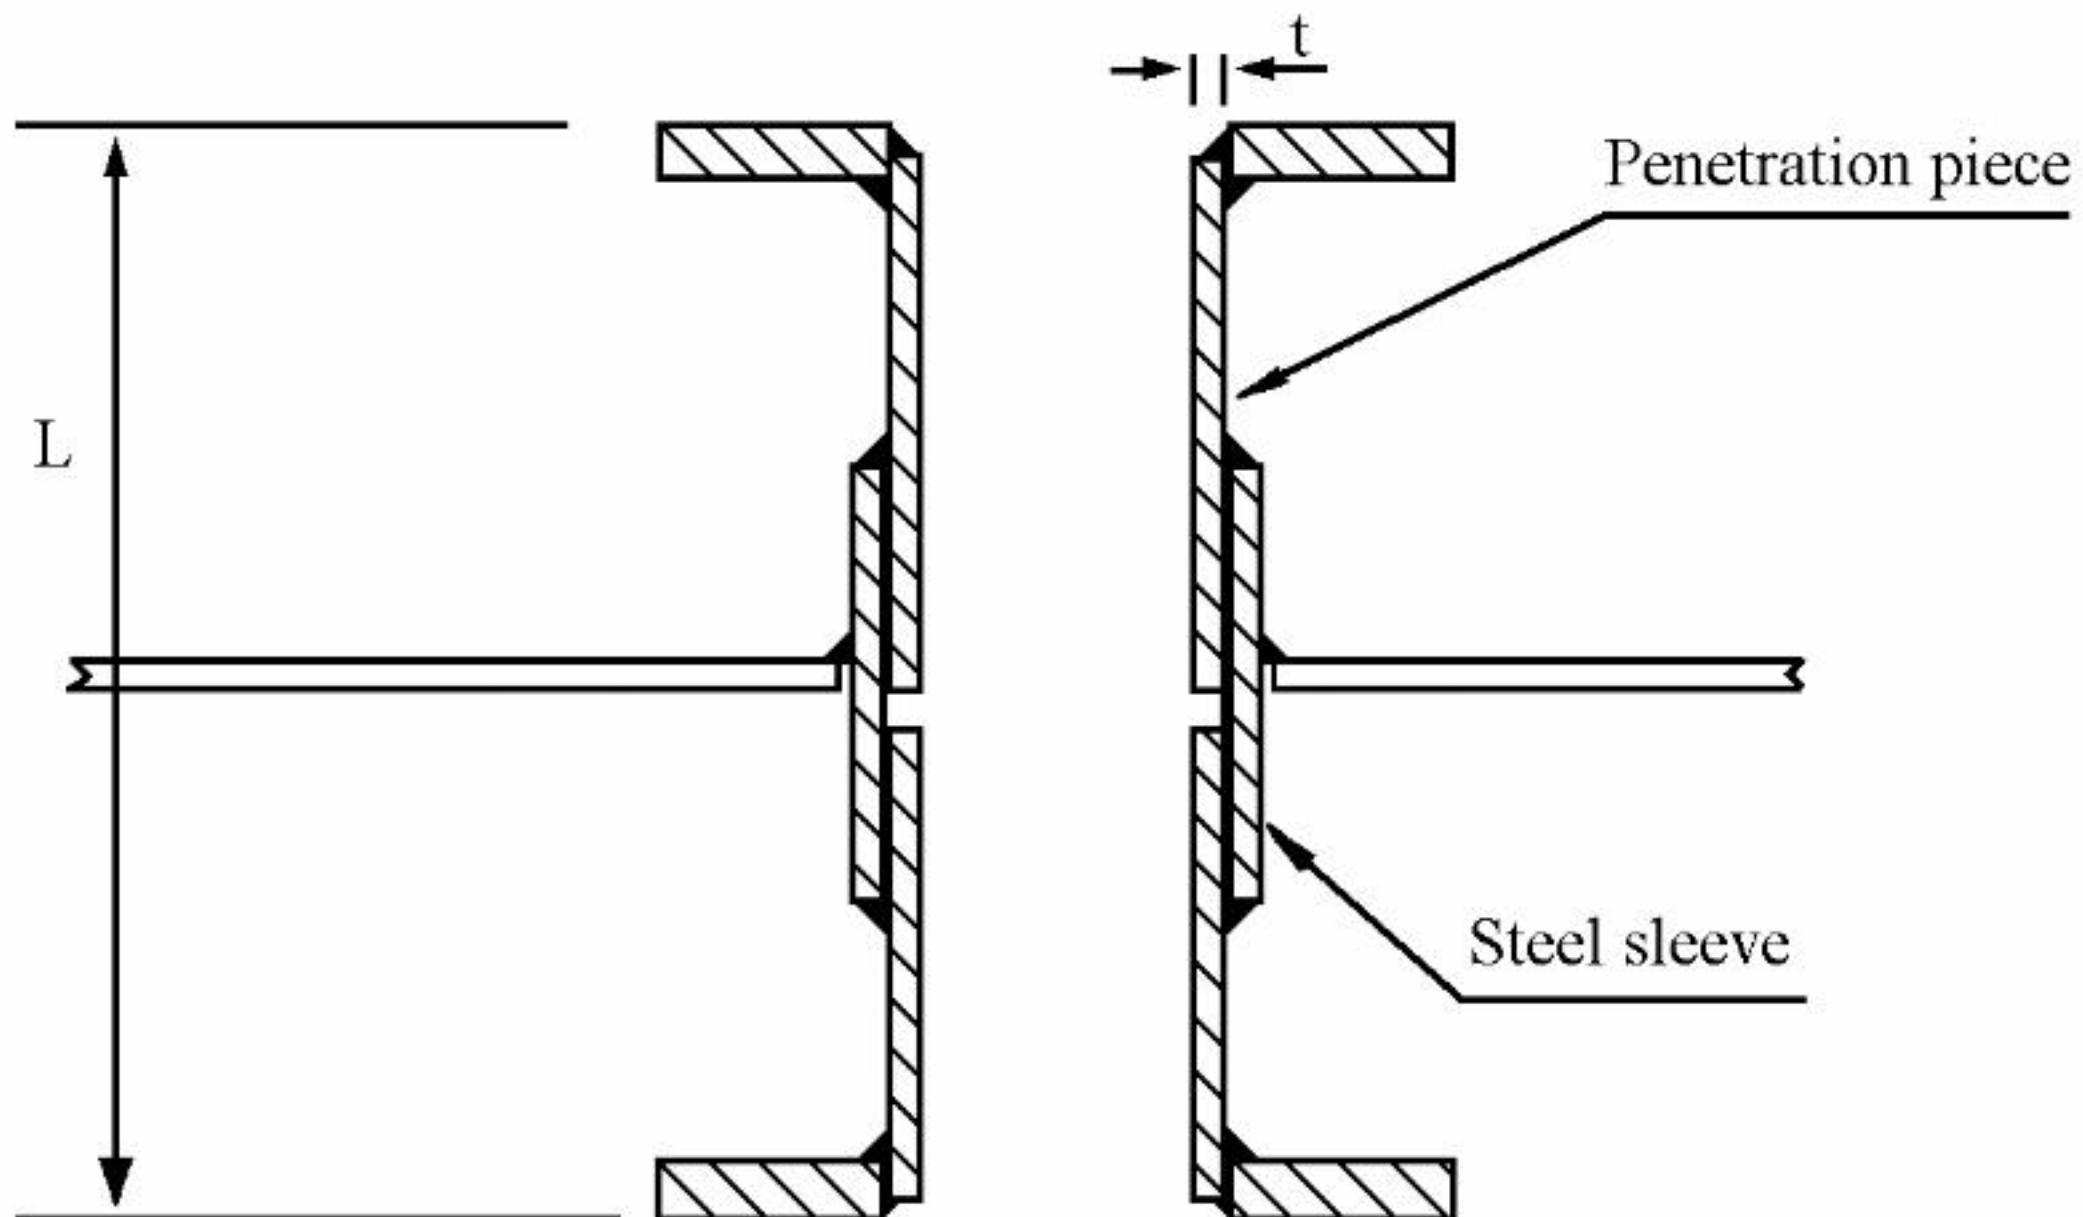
, Penetration through class A divisions with steel sleeve and penetration piece with flange
